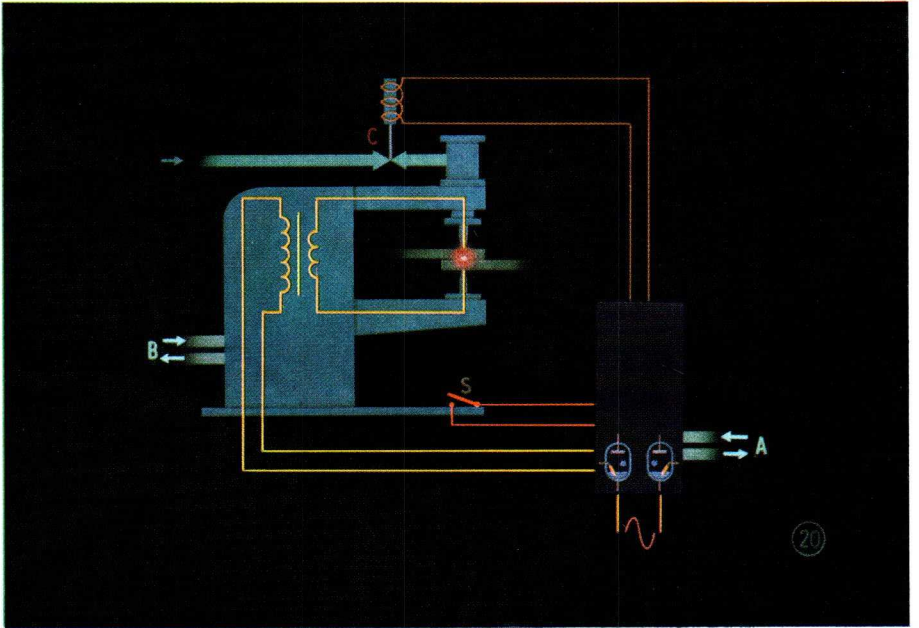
Schematic representation of typical spot welding machine.
